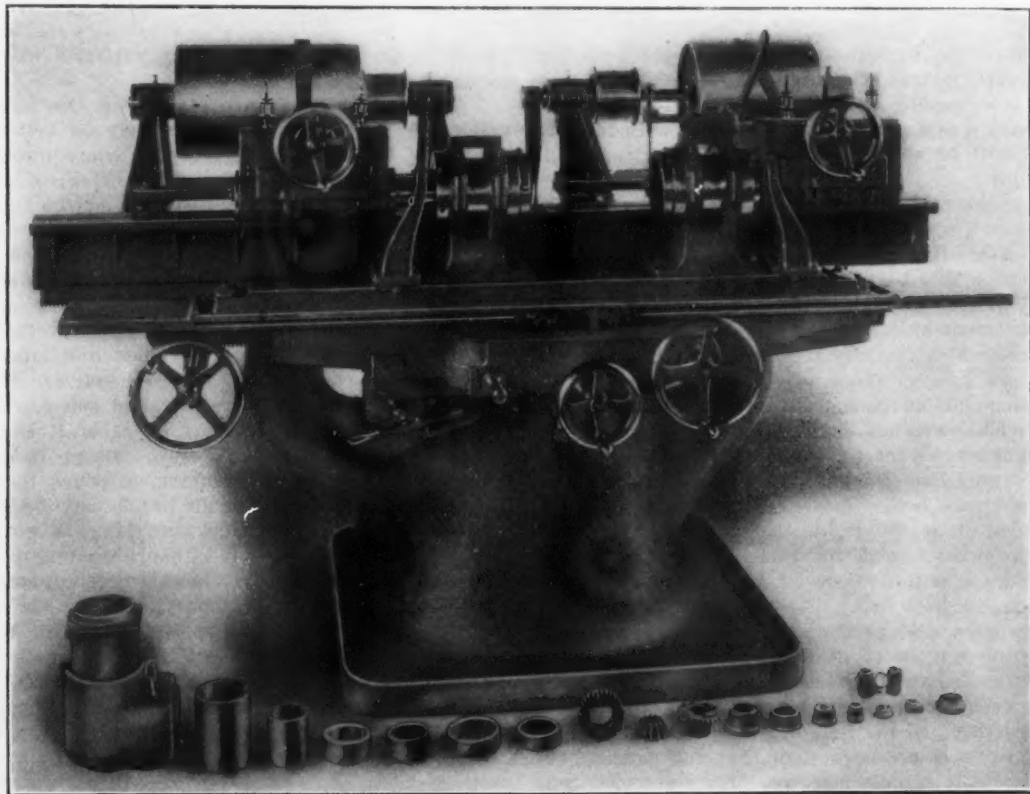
The Improved Duplex Internal Grinding Machine Built by the Bath Grinder Company, Fitchburg, Mass.
